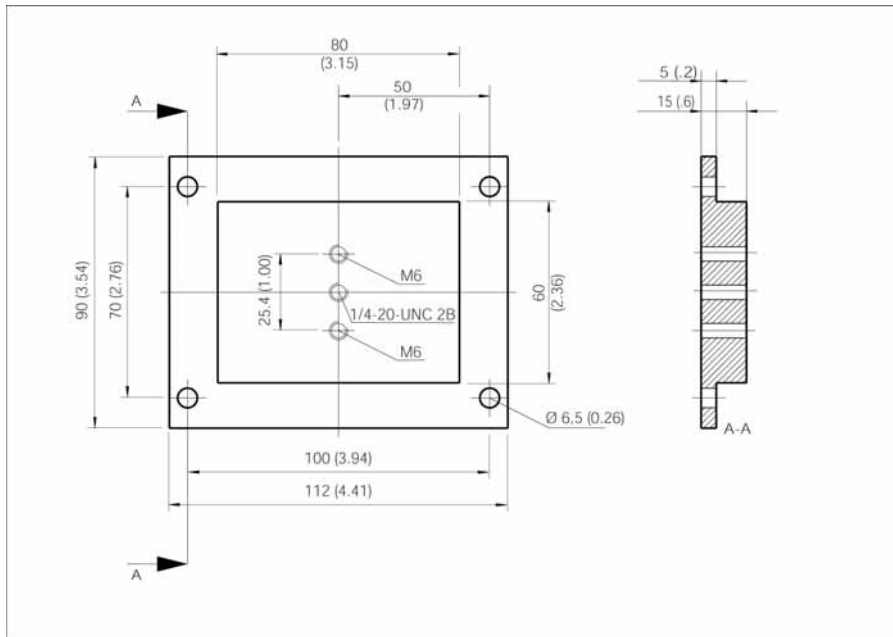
Mounting plate for tripod (1/4" thread) (XXXTMP50ACMP)
